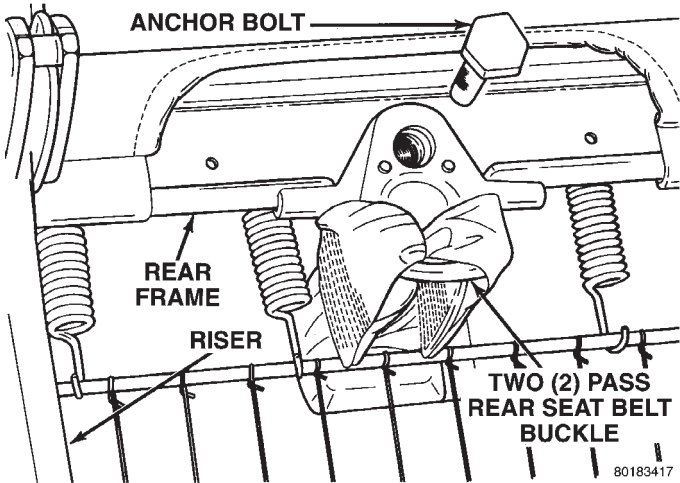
Seat Belt Buckle First Rear – Two Passenger Bench
